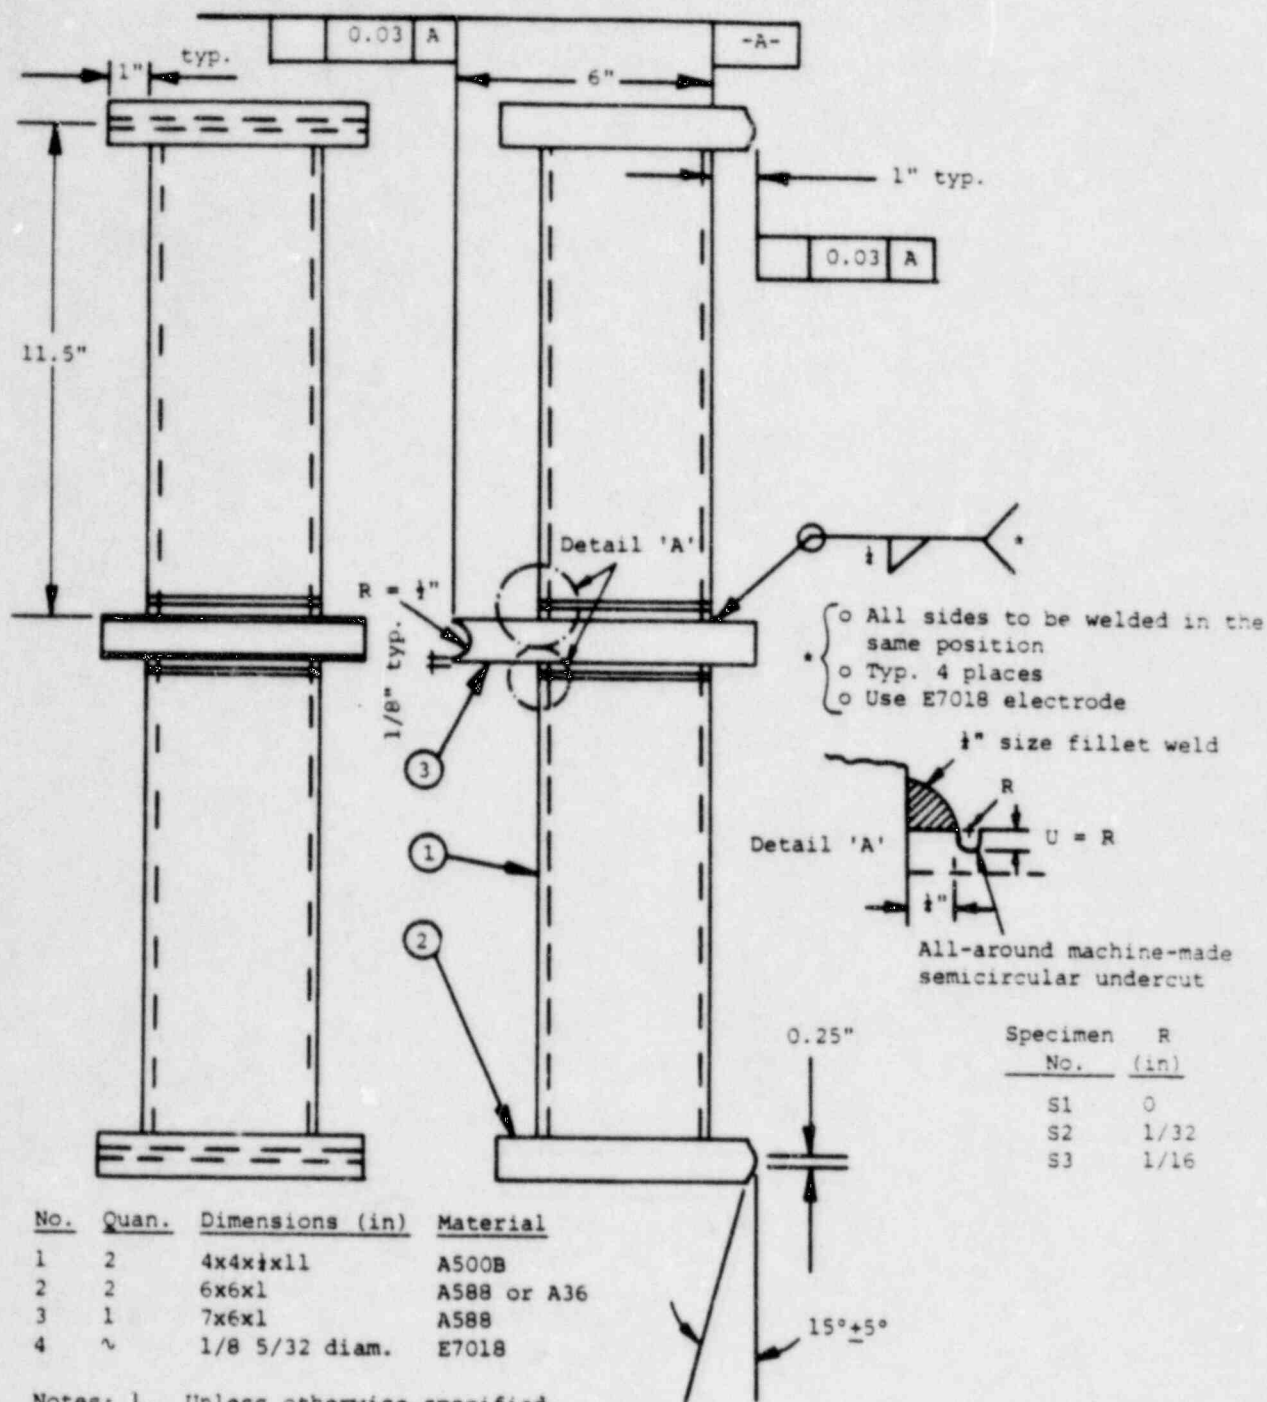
Details of Centric Specimens (S₁, S₂, and S₃)
